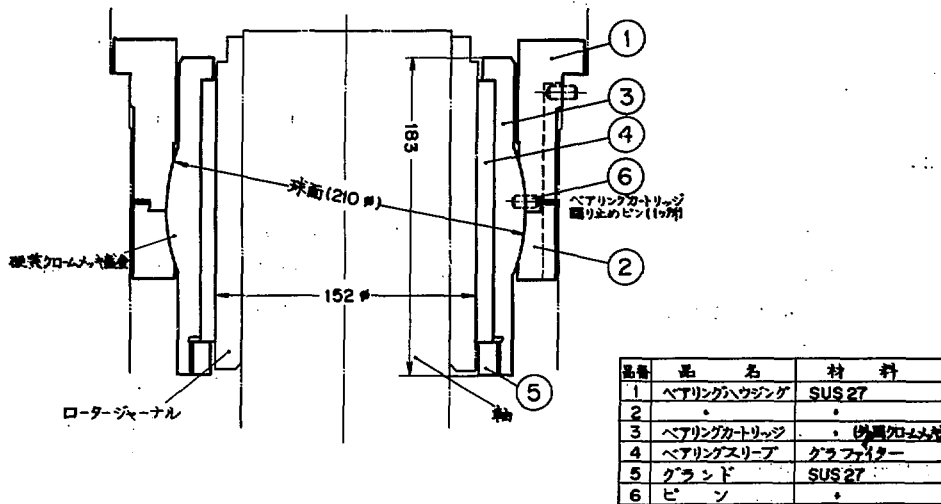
Radial bearing of JRR-3 main-pump (Modified)
